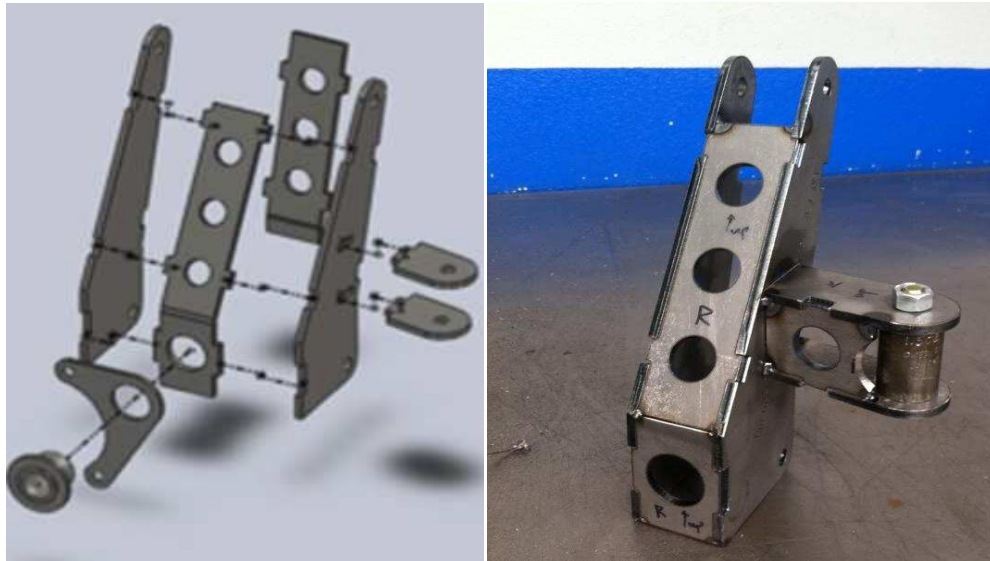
, 1.12: (Left) Exploded view of Spindle Assembly (Right) Fabricated Spindle
